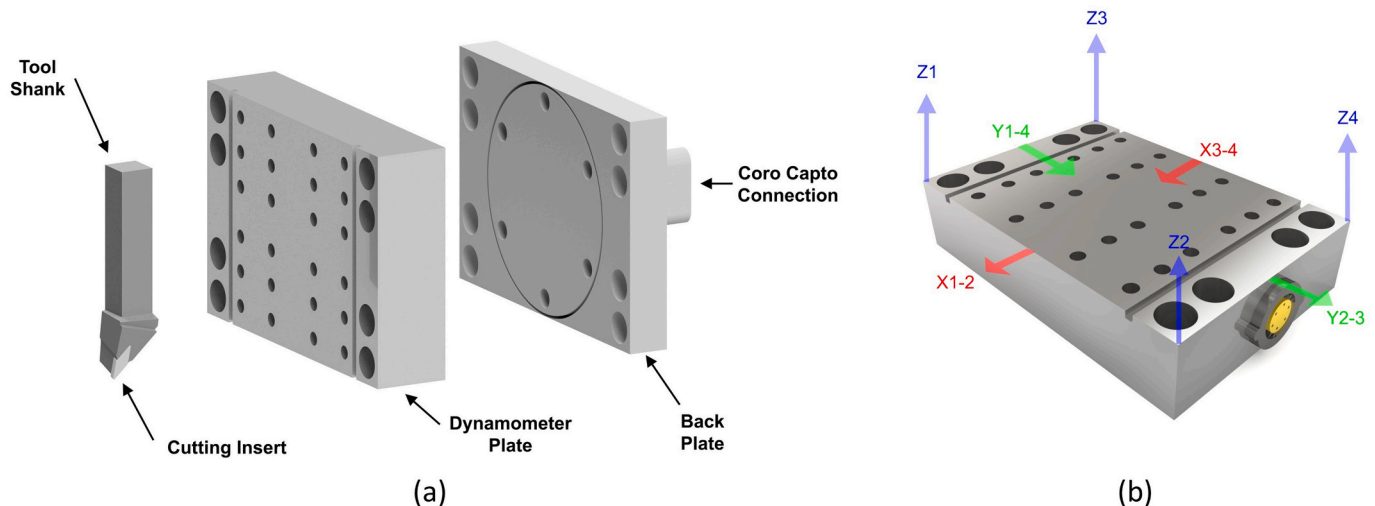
Exploded 3D Schematic of the Kistler 9129AA dynamometer assembly (a) and sensor location within the dynamometer plate (b).
